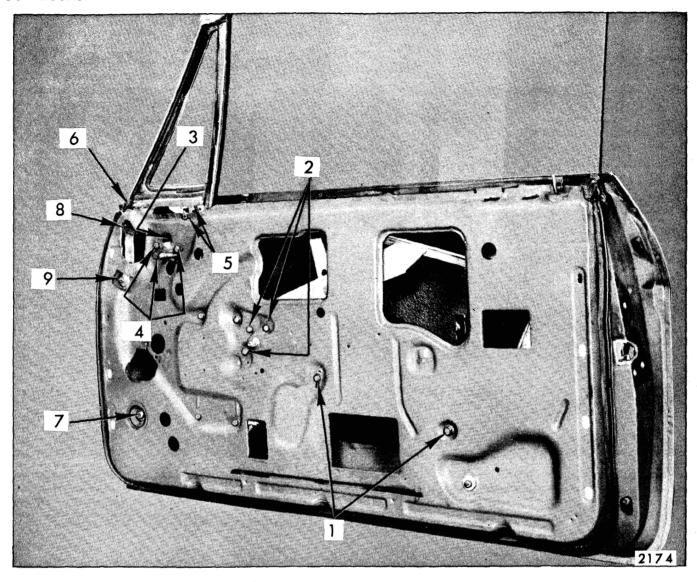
Front Door Hardware Attachment - "B & C" Styles
